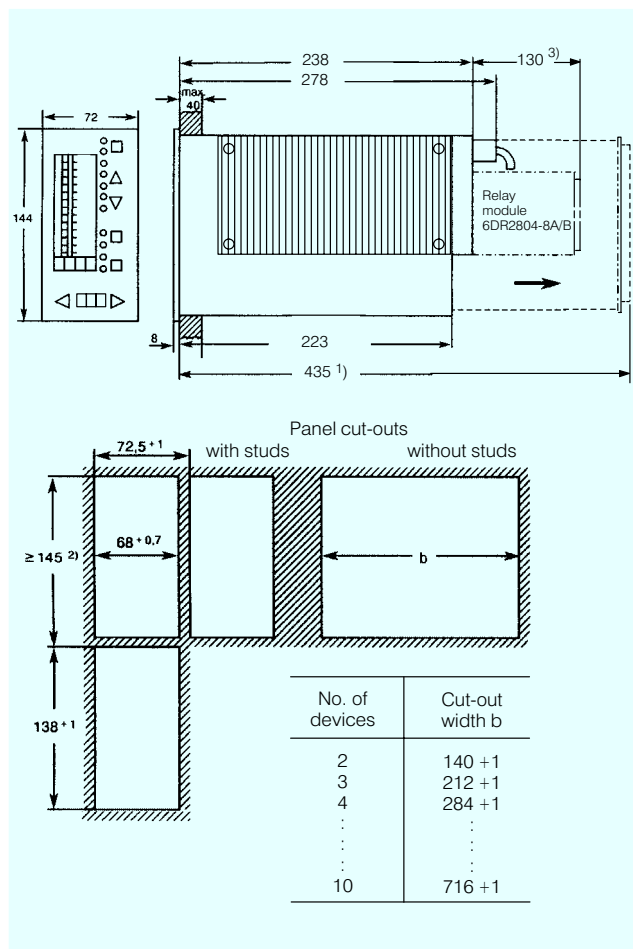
/7 SIPART DR24 multi-function unit and panel cut-outs, dimensions
